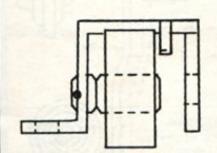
FIG. II - CHOKE THERMOSTAT ASSEMBLY - 327 V-8 (275 HP)
